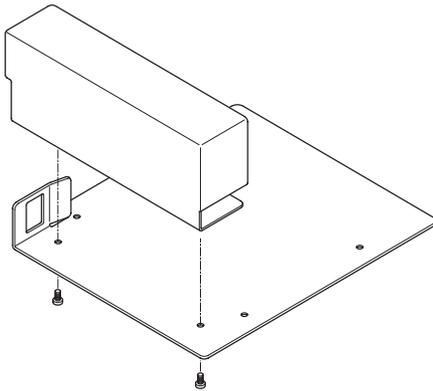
Dismantling the Tape Drive Filler Panel
